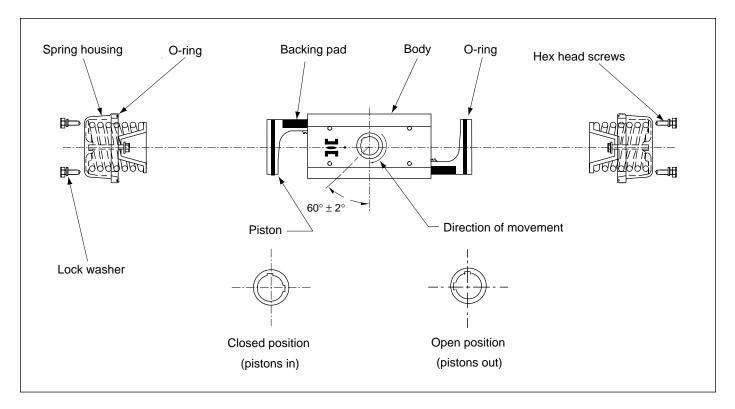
Top view of (Fail Close) Single Acting Actuator Assembly - Models 003-036
